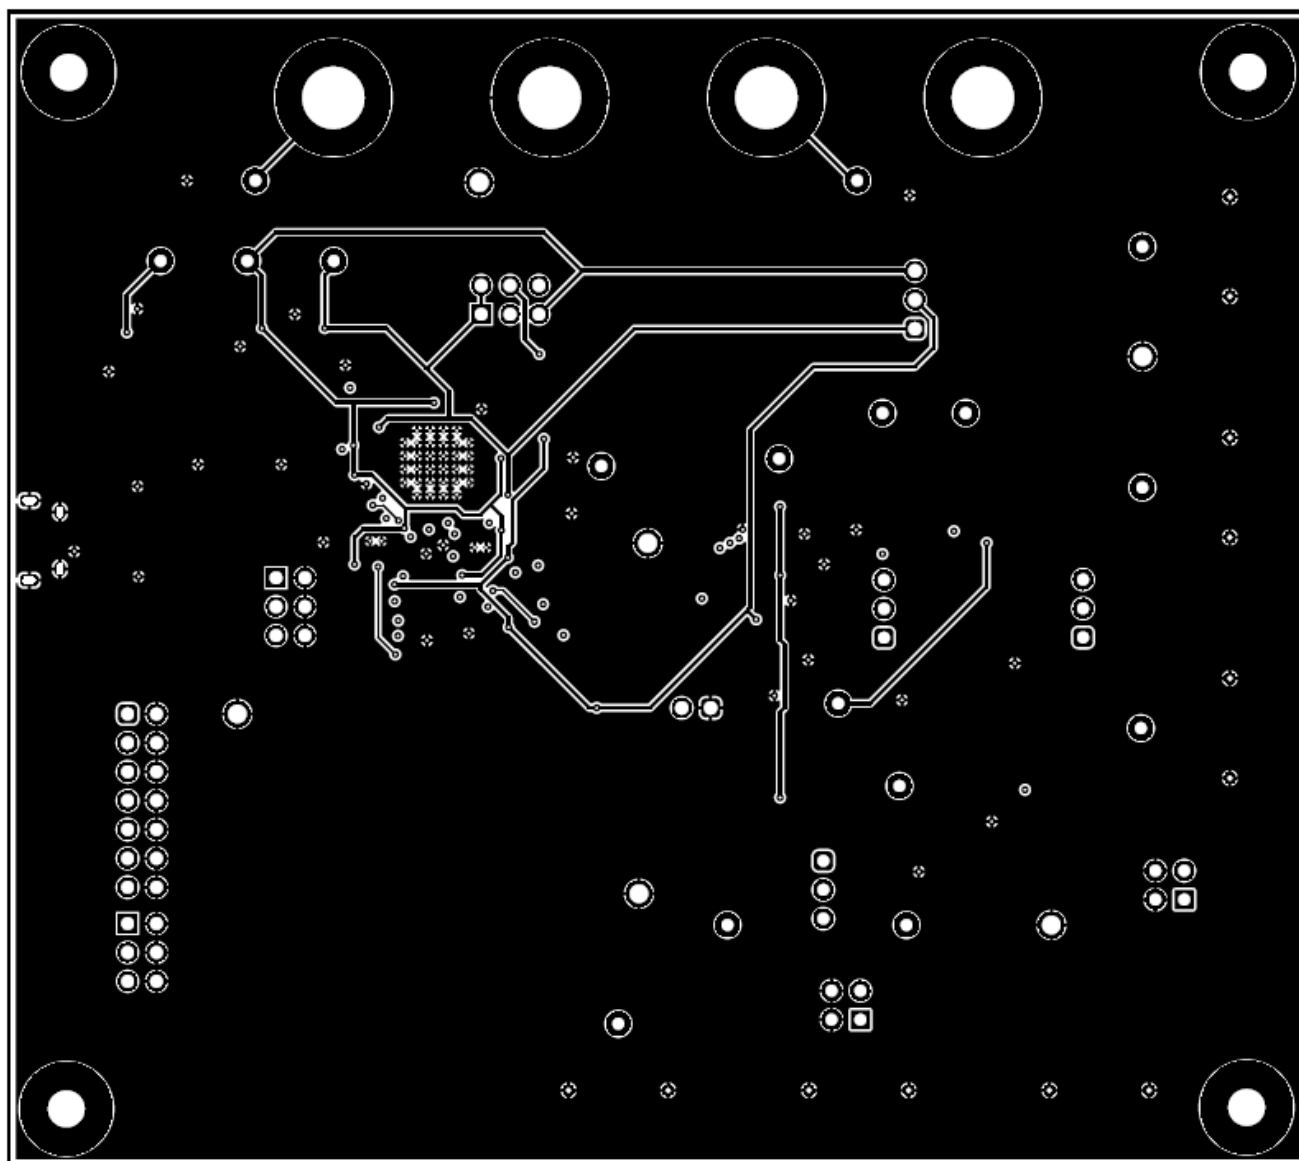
AFE881H1EVM PCB Mid Layer 2 Layout
